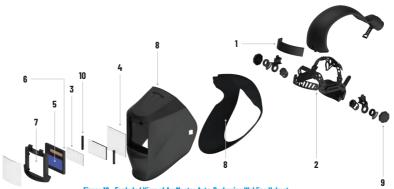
Exploded View of ArcMaster Auto-Darkening Welding Helmet
